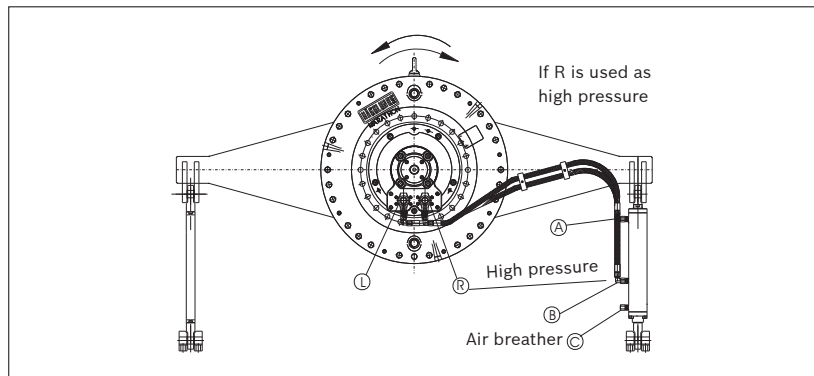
a: Example of a motor with a double torque arm, with cylinder mounted on the right hand side of the motor, viewed from the connection side.
